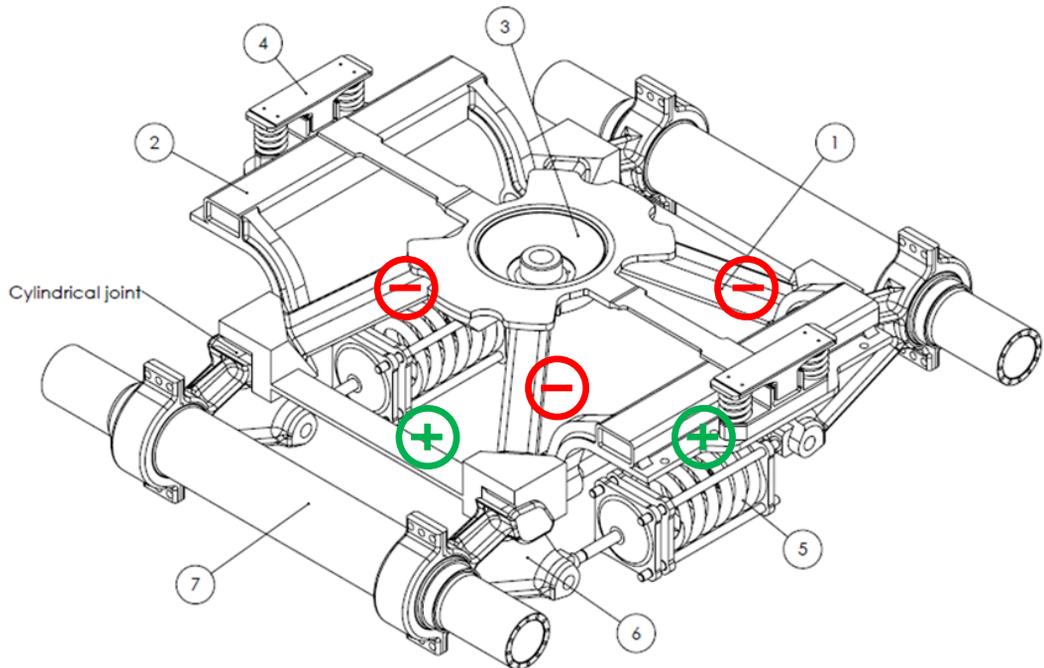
Main components of the 4L bogie. 1: pyramidal frame; 2: supporting arm for side bearer and brake calipers for wheel web mounted discs (or compact tread braking units); 3: centre bowl; 4: side bearers; 5: horizontal coil springs with single-stage progressive stiffness; 6: swinging arm; 7: Inboard bearings axle. “Legs” are compressed (indicated with “-“), while the basis of the frame is in tension (indicated with “+“)
